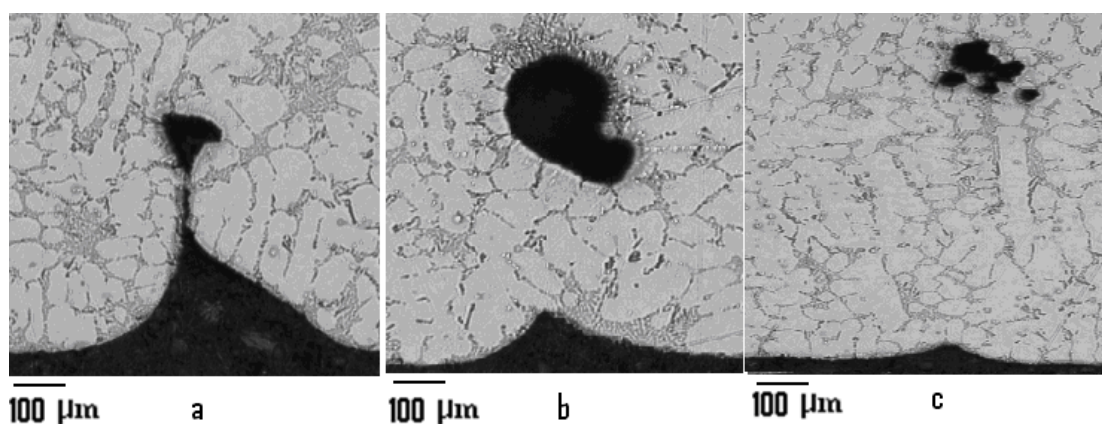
Defects occurring at the base of the castings. (a) Casting made with unirradiated foam pattern, (b) and (c) castings made with irradiated foam patterns, (30 and 75 MRad respectively).
